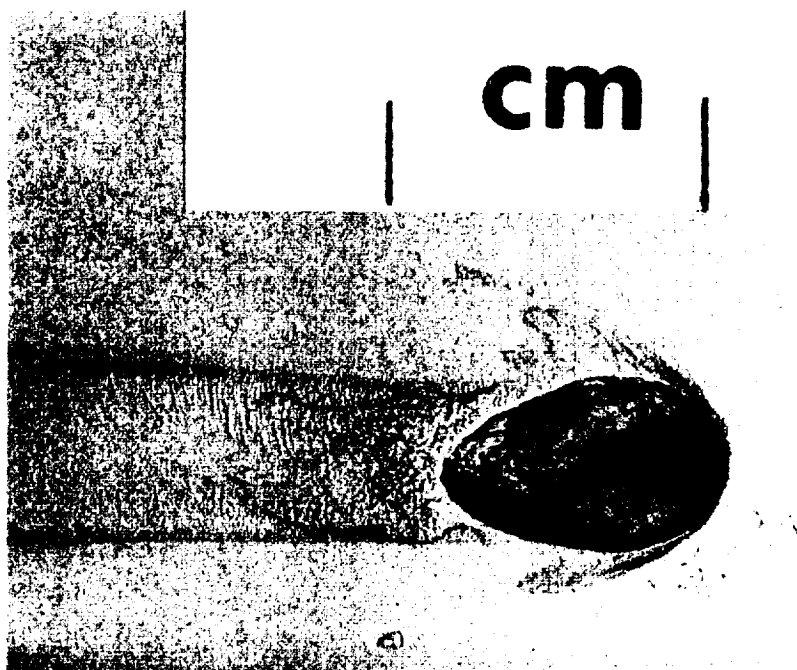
The top view of a decanted weld pool in Inconel-718.
